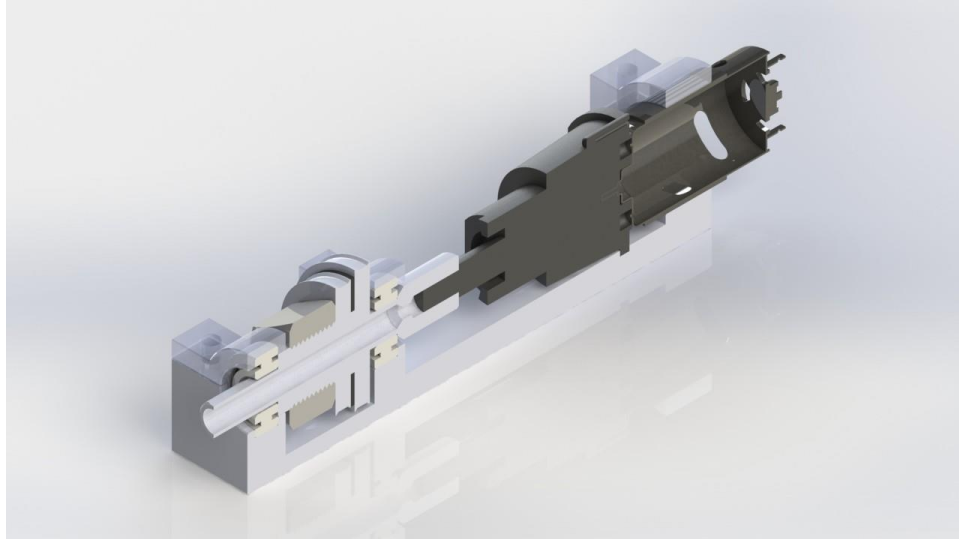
Elbow Motor Housing Revision 1 (Section View)
